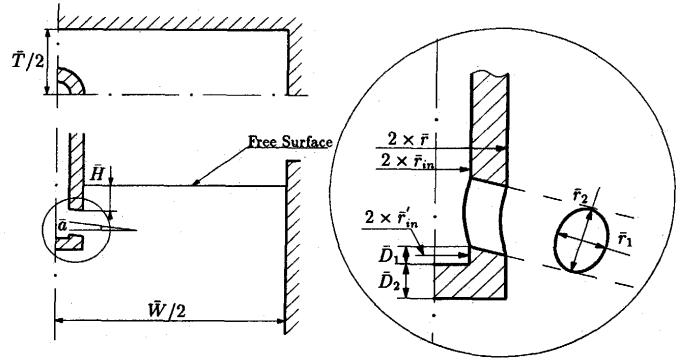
Schematic view and symbols of main mold and nozzle dimensions.
